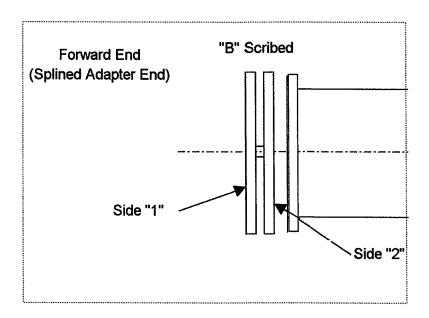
Forward End Bolt Layout for Sub Assembly Balance
